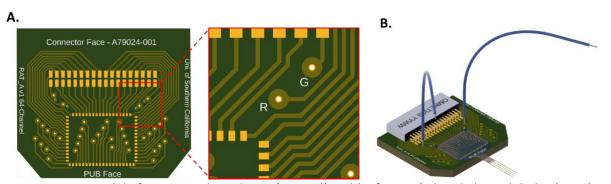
A. CAD model of PCB. G and R indicate 'Ground' and 'Reference' plated-through holes (PTHs). B. CAD model of assembled MEA, PCB, Omnetics connectors and ground wires.
